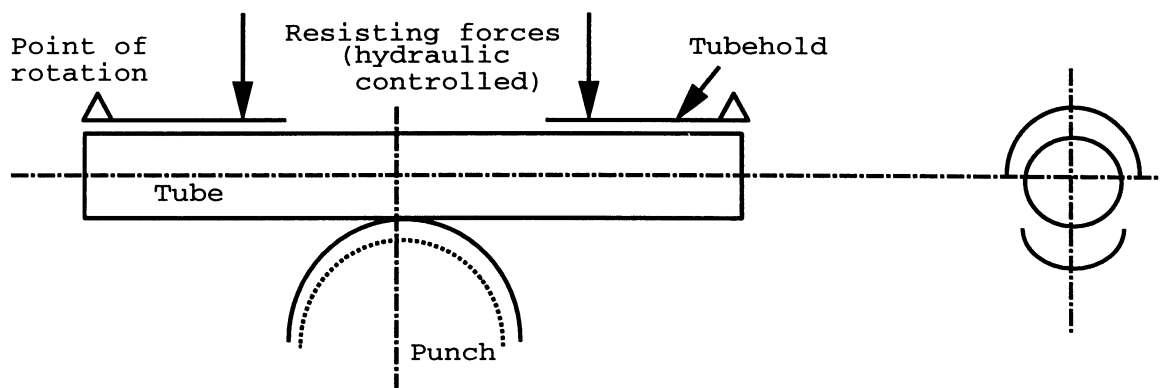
Illustration of the stretch bending process. The tube holds are free to rotate around a fixed point, the only adjustable process parameters are speed and tube hold.
